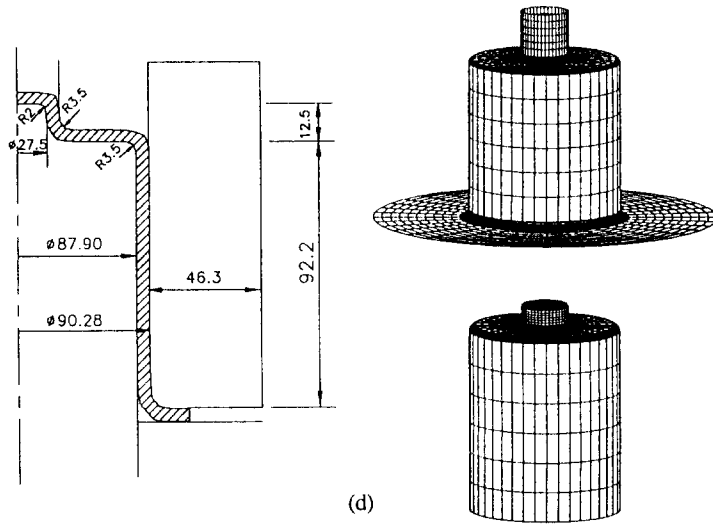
Geometry of the tooling and schematic view of the tool surfaces described with parametric patches for multi-stage deep drawing :
